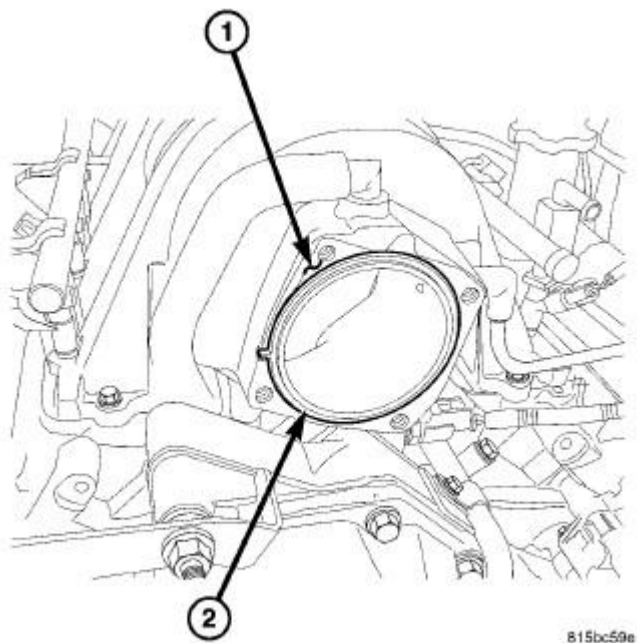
Throttle Body O-Ring At Front Of Intake Manifold
